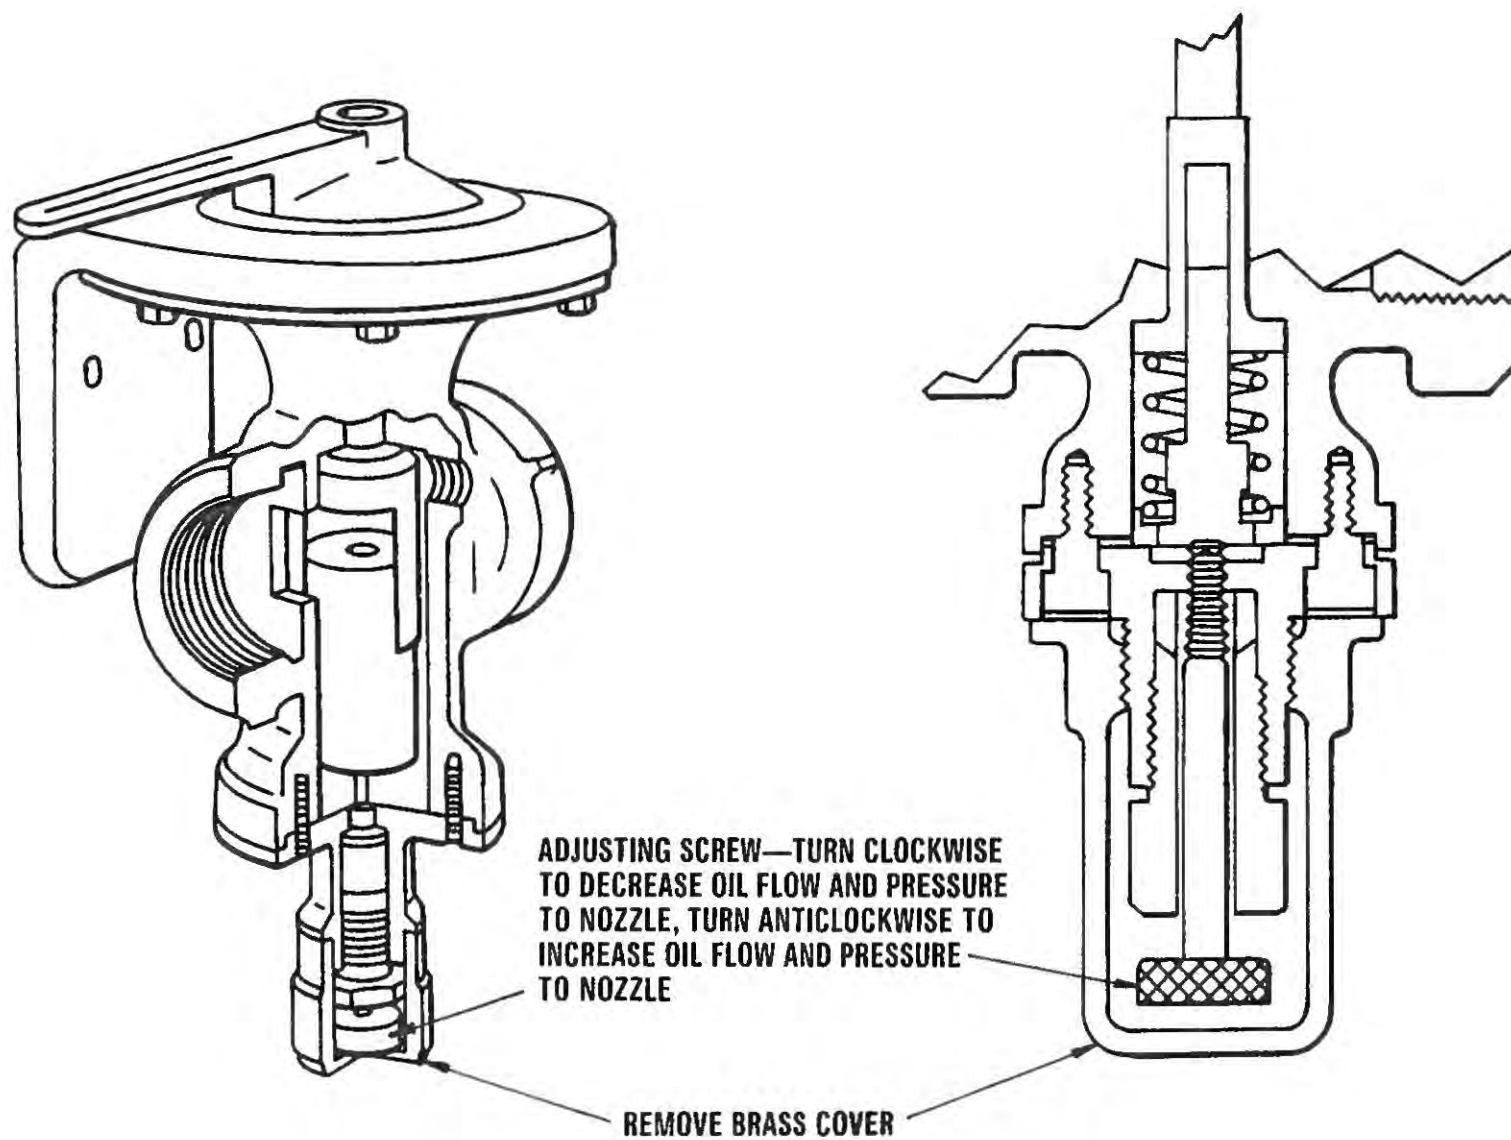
ADJUSTMENT OF ORIFICE - OIL METERING VALVE 500 THRU 750 HP.
